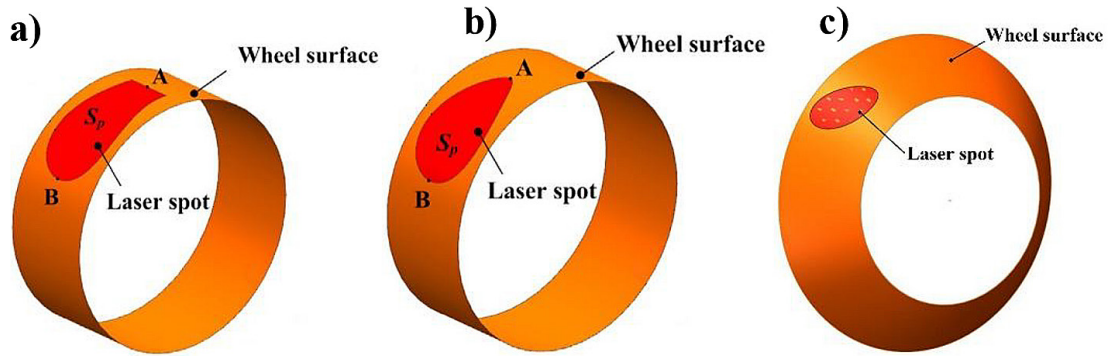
Geometry of the laser beam spot on the: (a, b) cylindrical [23], (c) conical [24] grinding wheel surface
